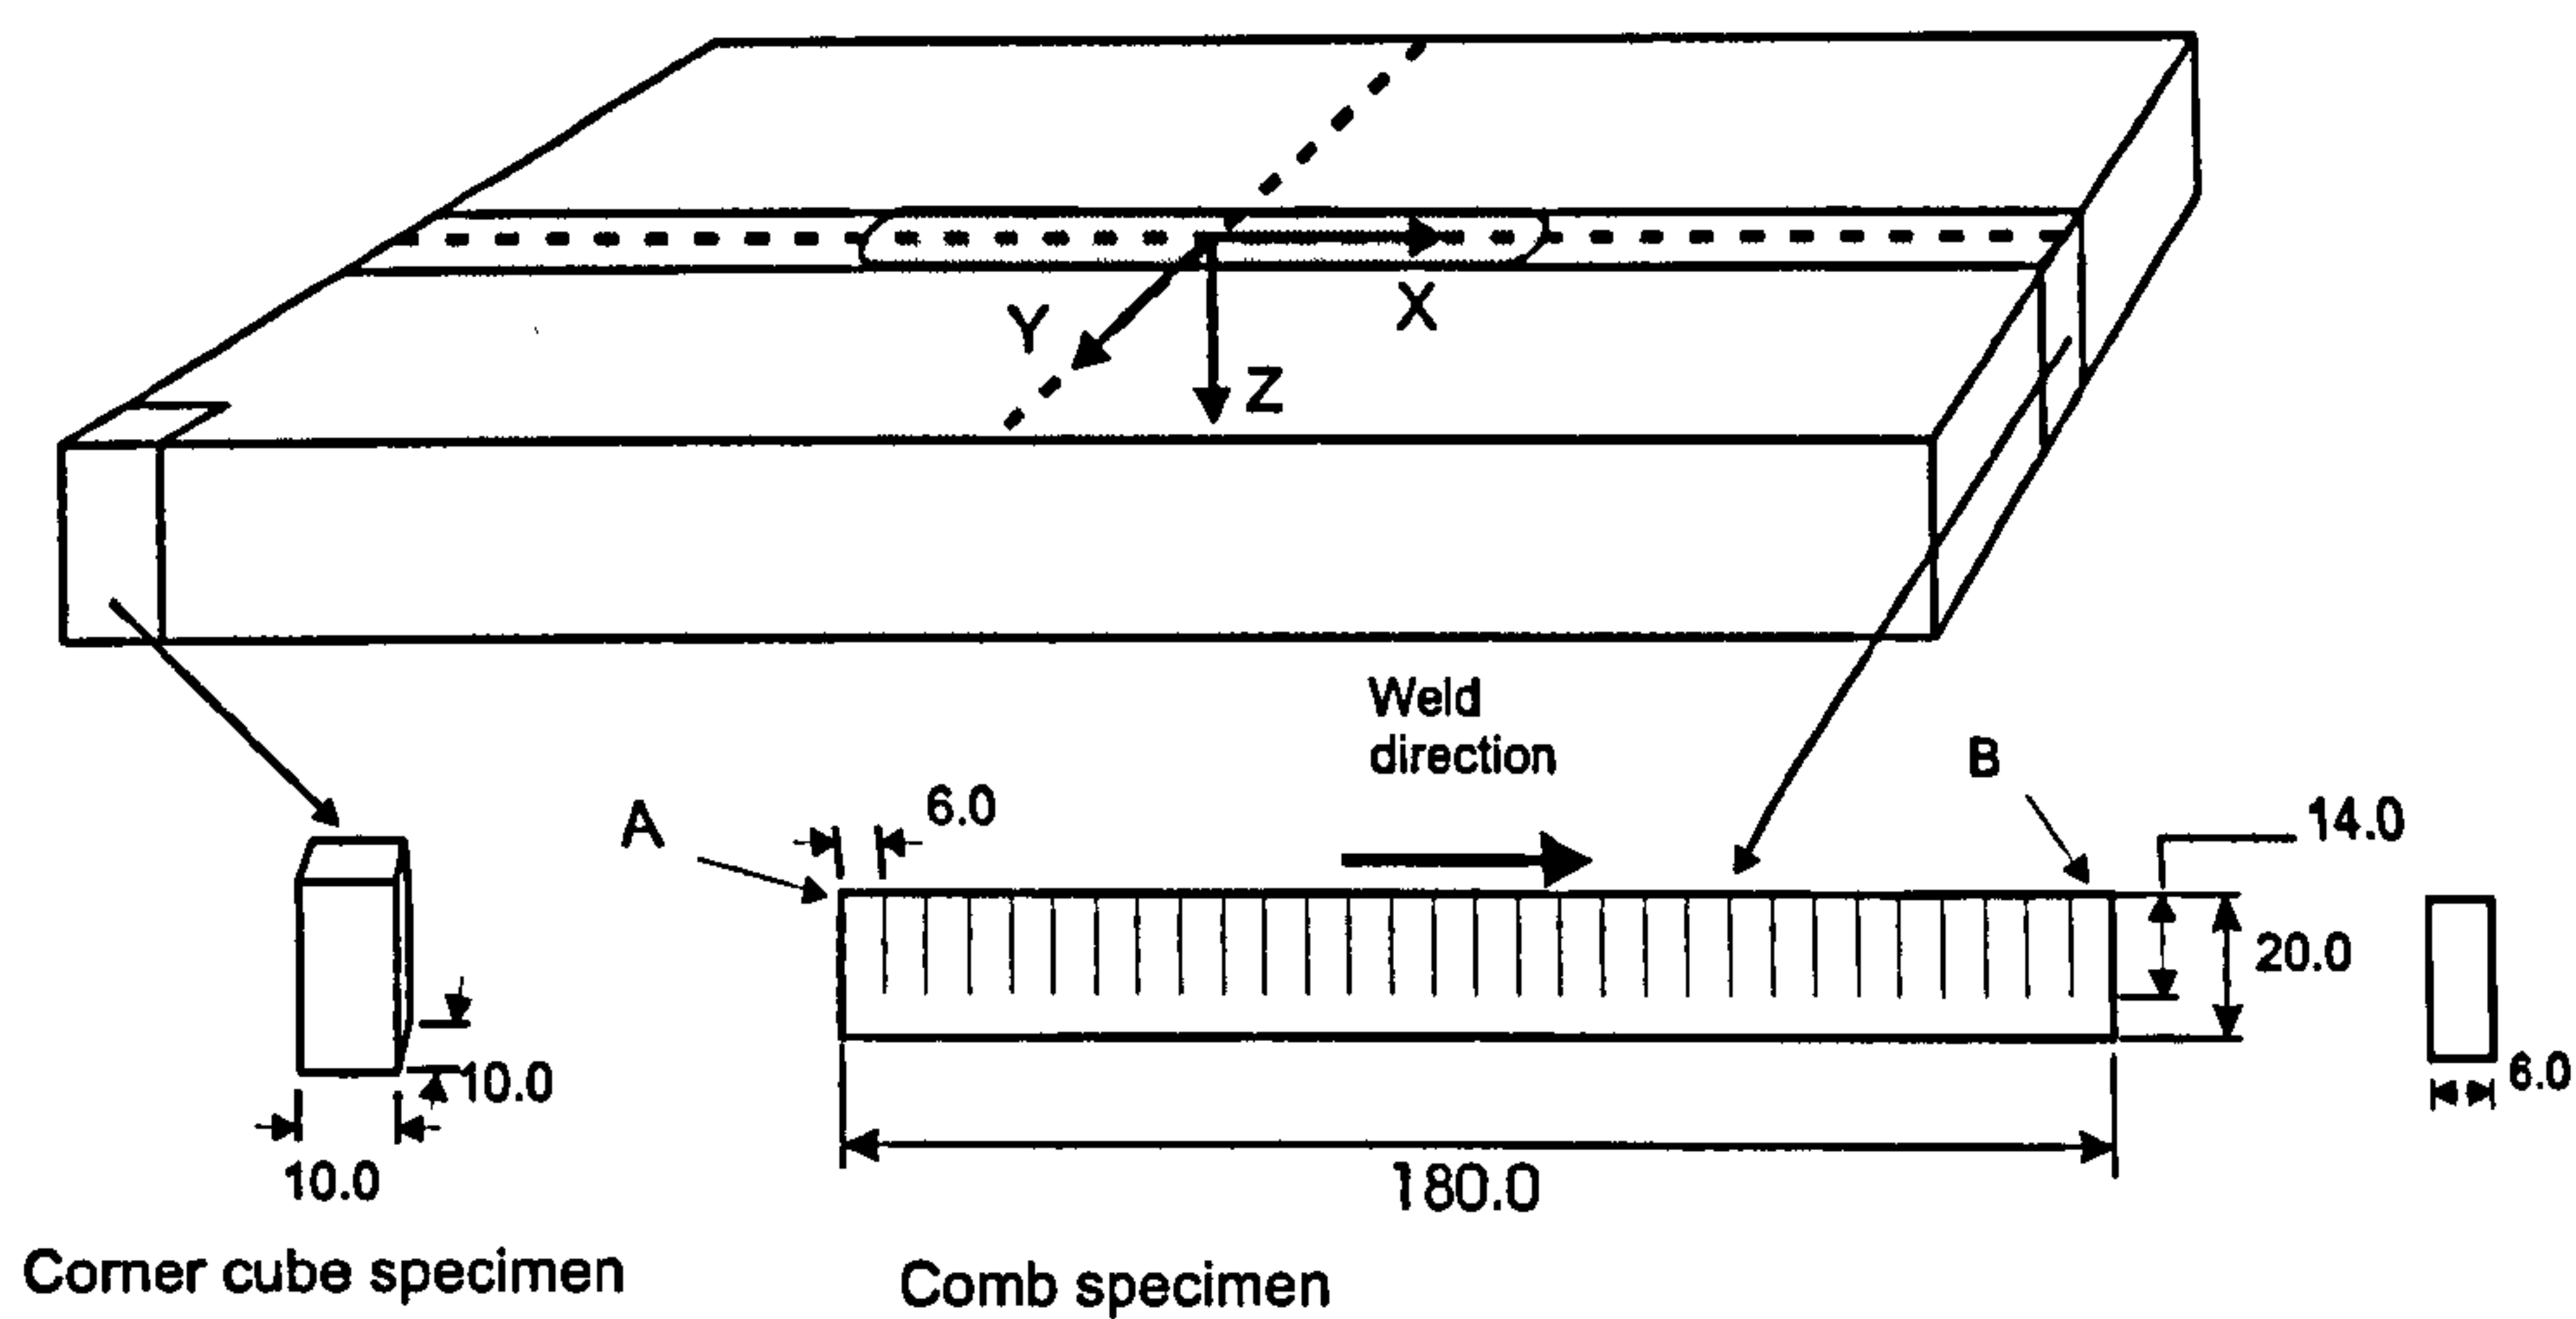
Geometry for extracted comb specimen taken from one of the partially welded 316L austenitic steel plates. Dimensions in mm.
